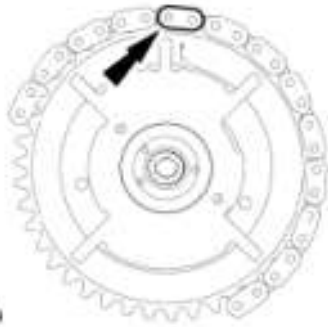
Locating Camshaft Sprocket Timing Mark With Copper Link
